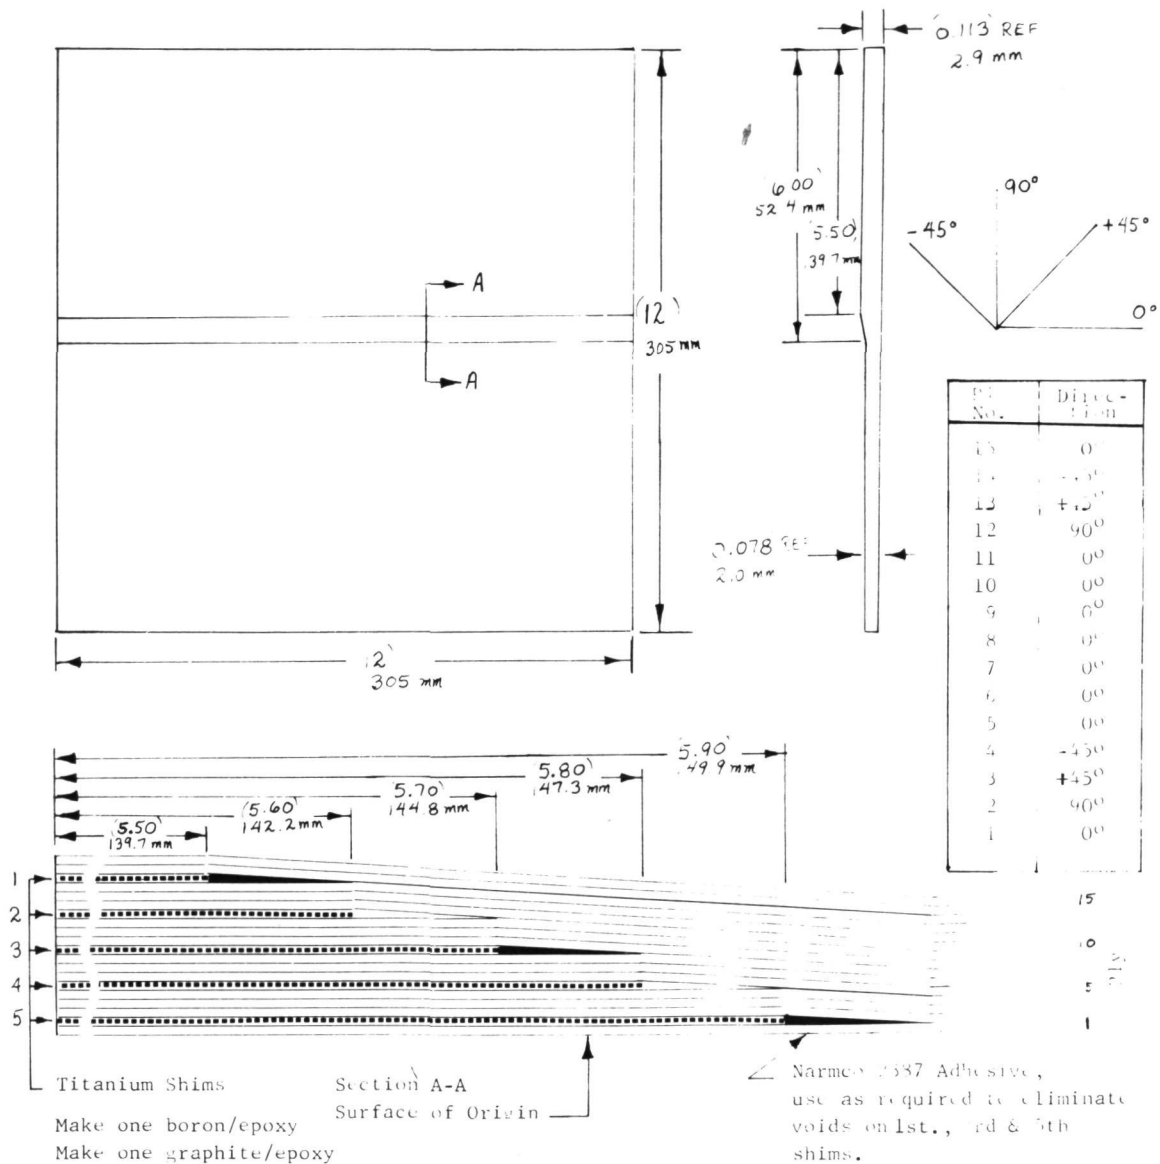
DESIGN DRAWING OF THE INTERLAYERED SHIM PANELS.
